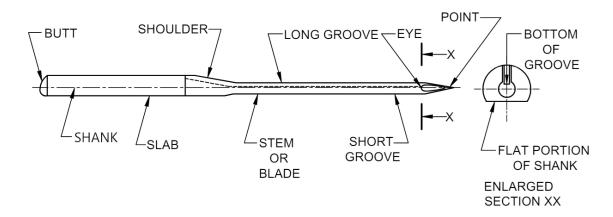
NOMENCLATURE OF SEWING MACHINE NEEDL
